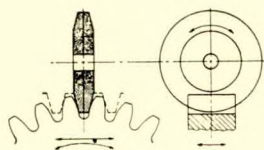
Gear-tooth generating grinding with straight-contour wheel
